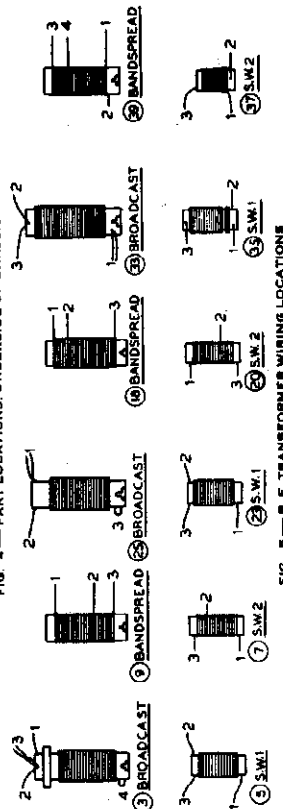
R. F. TRANSFORMER WIRING LOCATIONS
